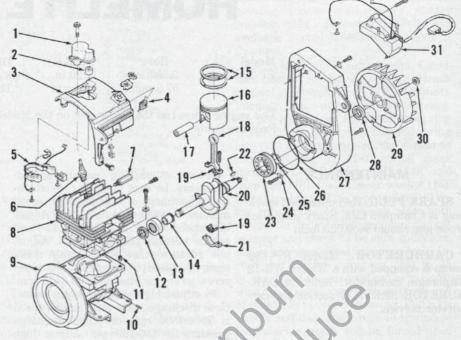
Exploded view of engine used on Model FP-150 pump.
